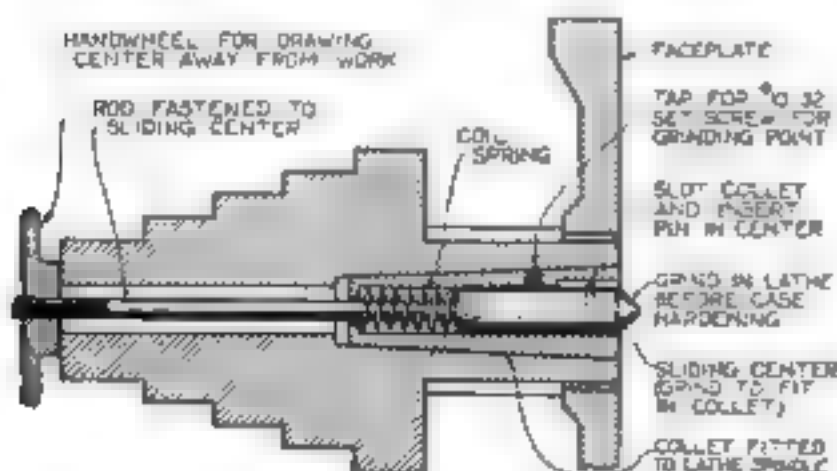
A spring-actuated center for a lathe, which saves time in locating work that is to be clamped to the faceplate for boring.
